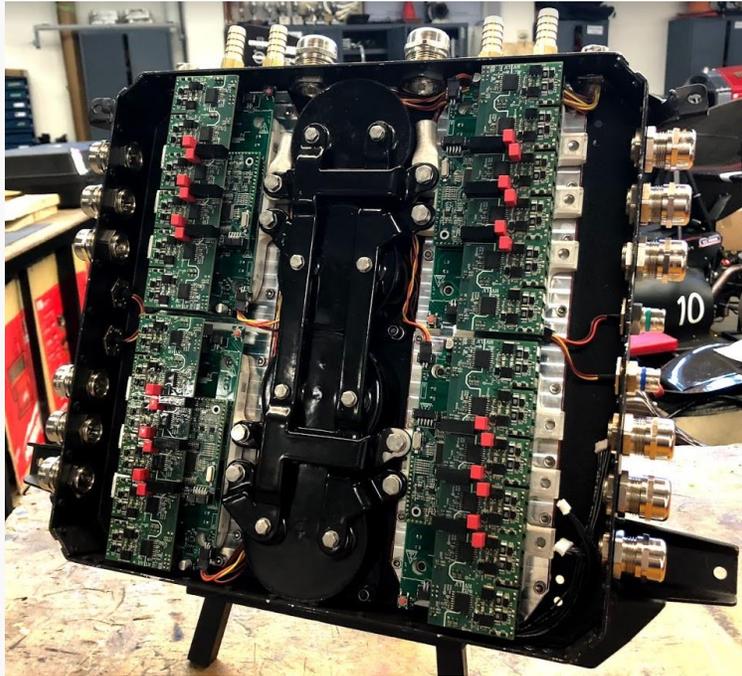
Final Quad Inverter Assembly (current sensors not shown)
